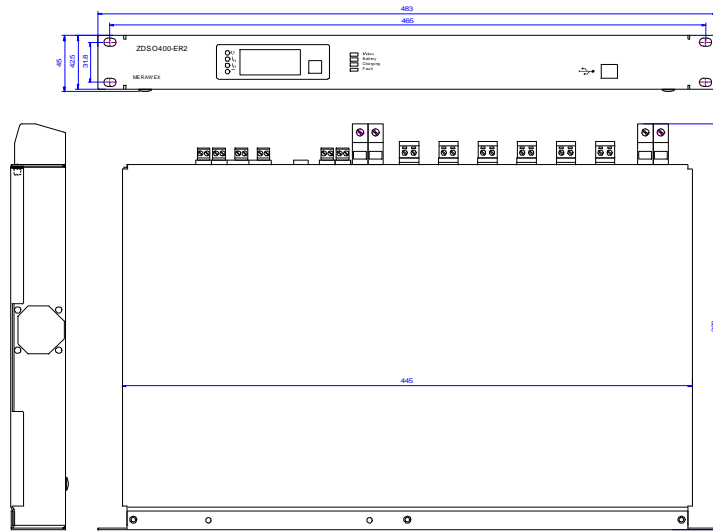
View and nominal dimensions of ZDSO400-ER2 emergency supplies
